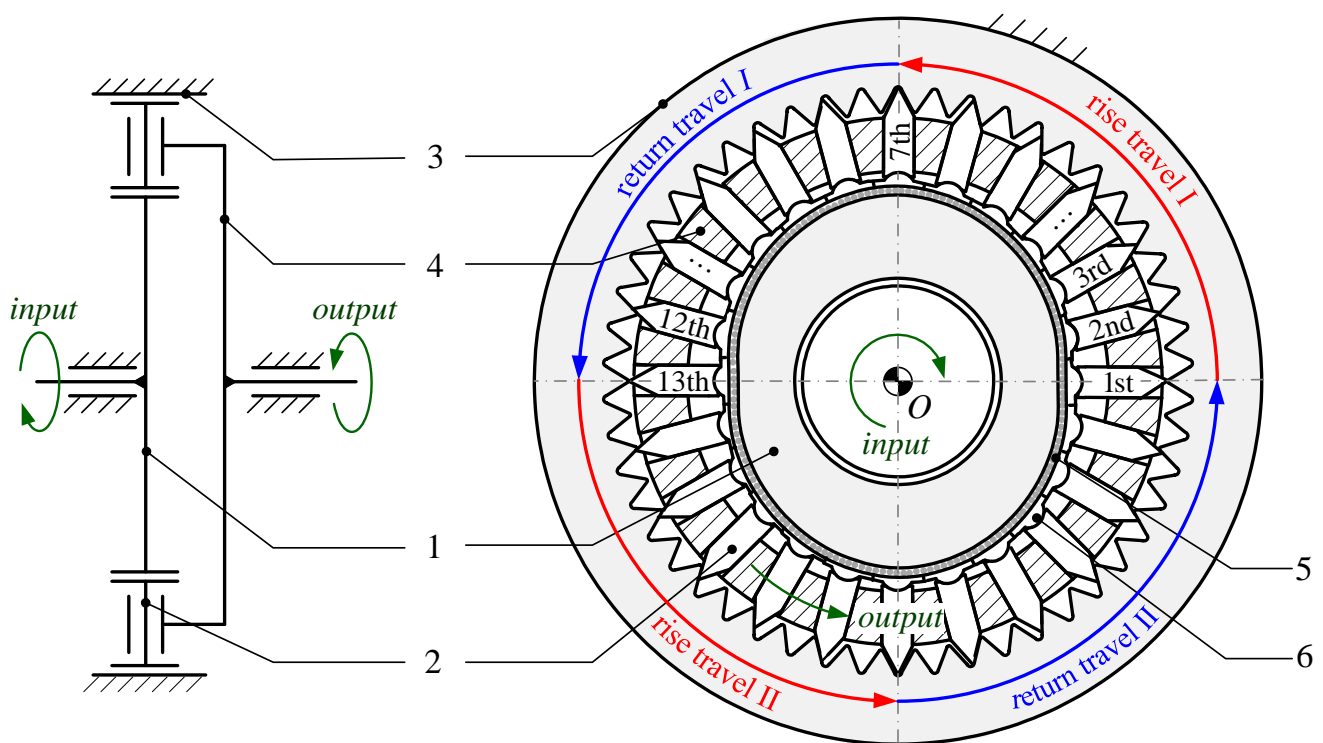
Schematic diagram of the novel movable tooth drive. 1-wave generator; 2-tooth carrier; 3-ring gear; 4-movable tooth; 5-needle roller; 6-pivoted segment.
